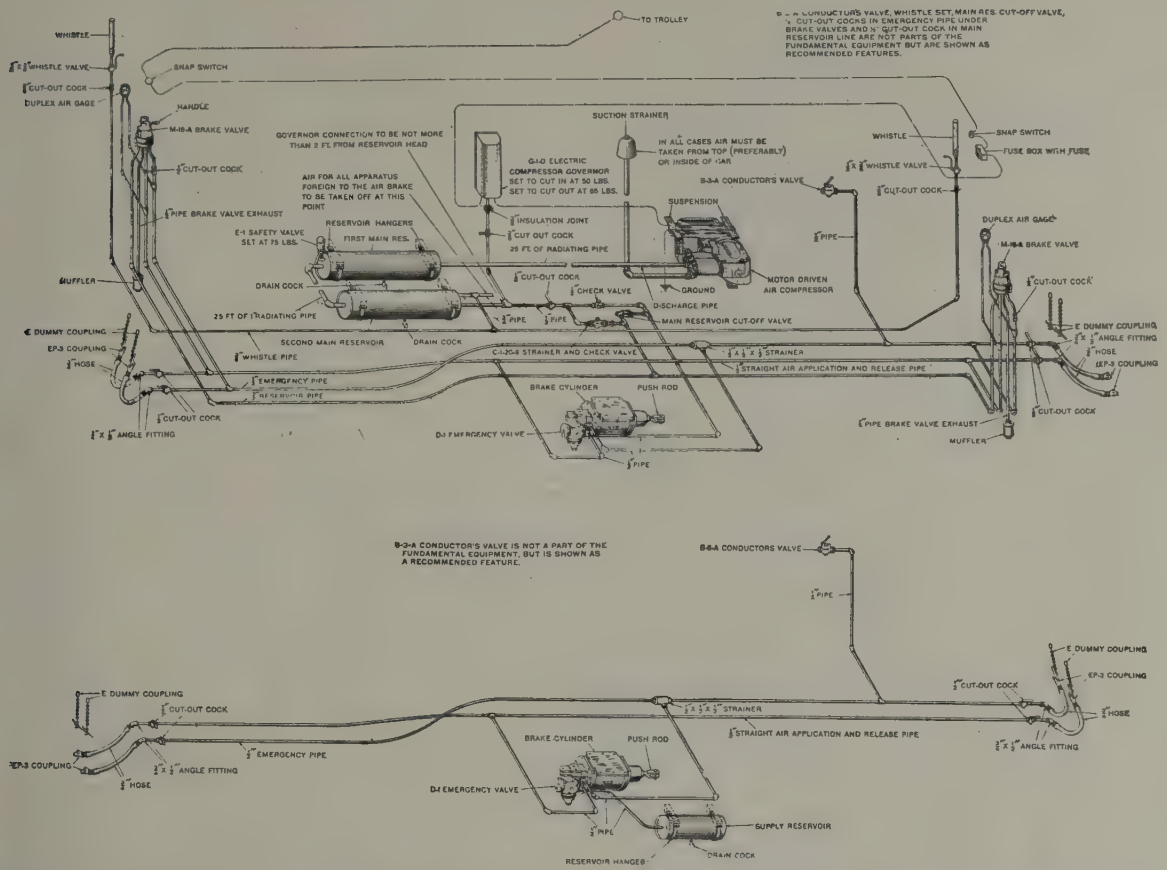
Diagram of Westinghouse Air Brake Equipment, Schedule SME with D-1 Emergency Valve. Straight Air Brake with Automatic Emergency Feature Primarily for Single Car Service. Under Some Conditions It May Be Used for Two-Car Trains, Consisting of Two Motor Cars or Motor Car and Trailer, Where the Motor Car Operates Singly Most of the Time.
